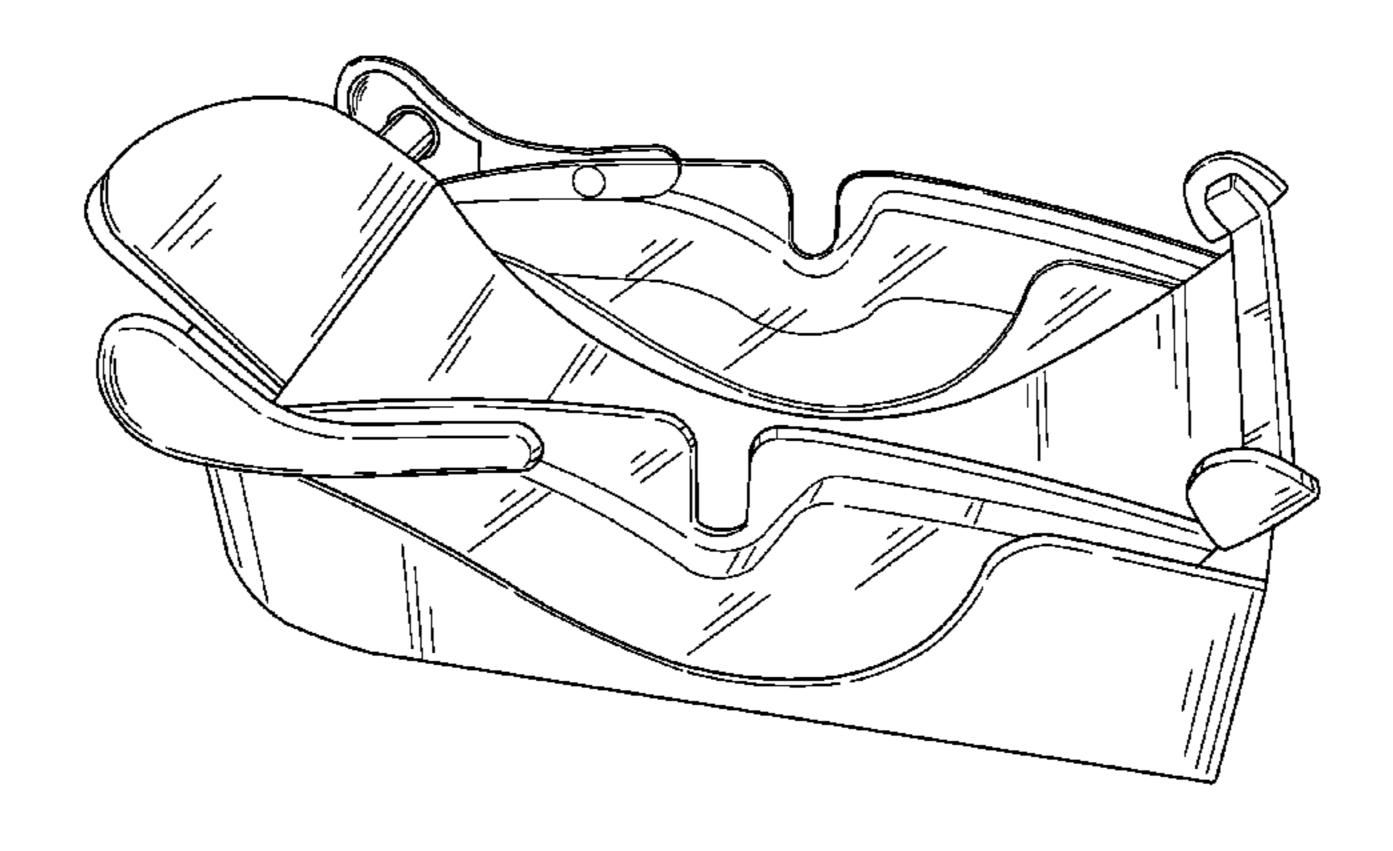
is a front, top, right side perspective view of the sushi maker including insert and cradle, with the insert inserted in the cradle, showing my new design;
